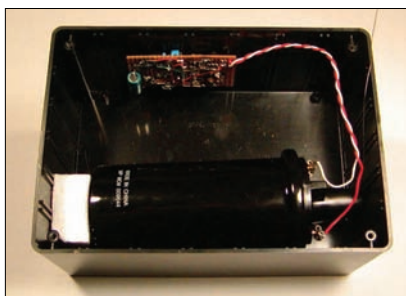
This shows the PCB mounted in place. White "styrofoam" holds the coil in place.
